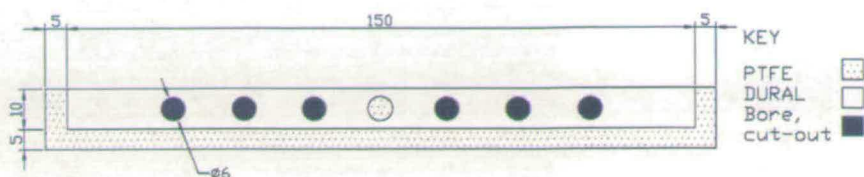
Vertical cross-section of the heat transferring plate; dimensions in mm.
